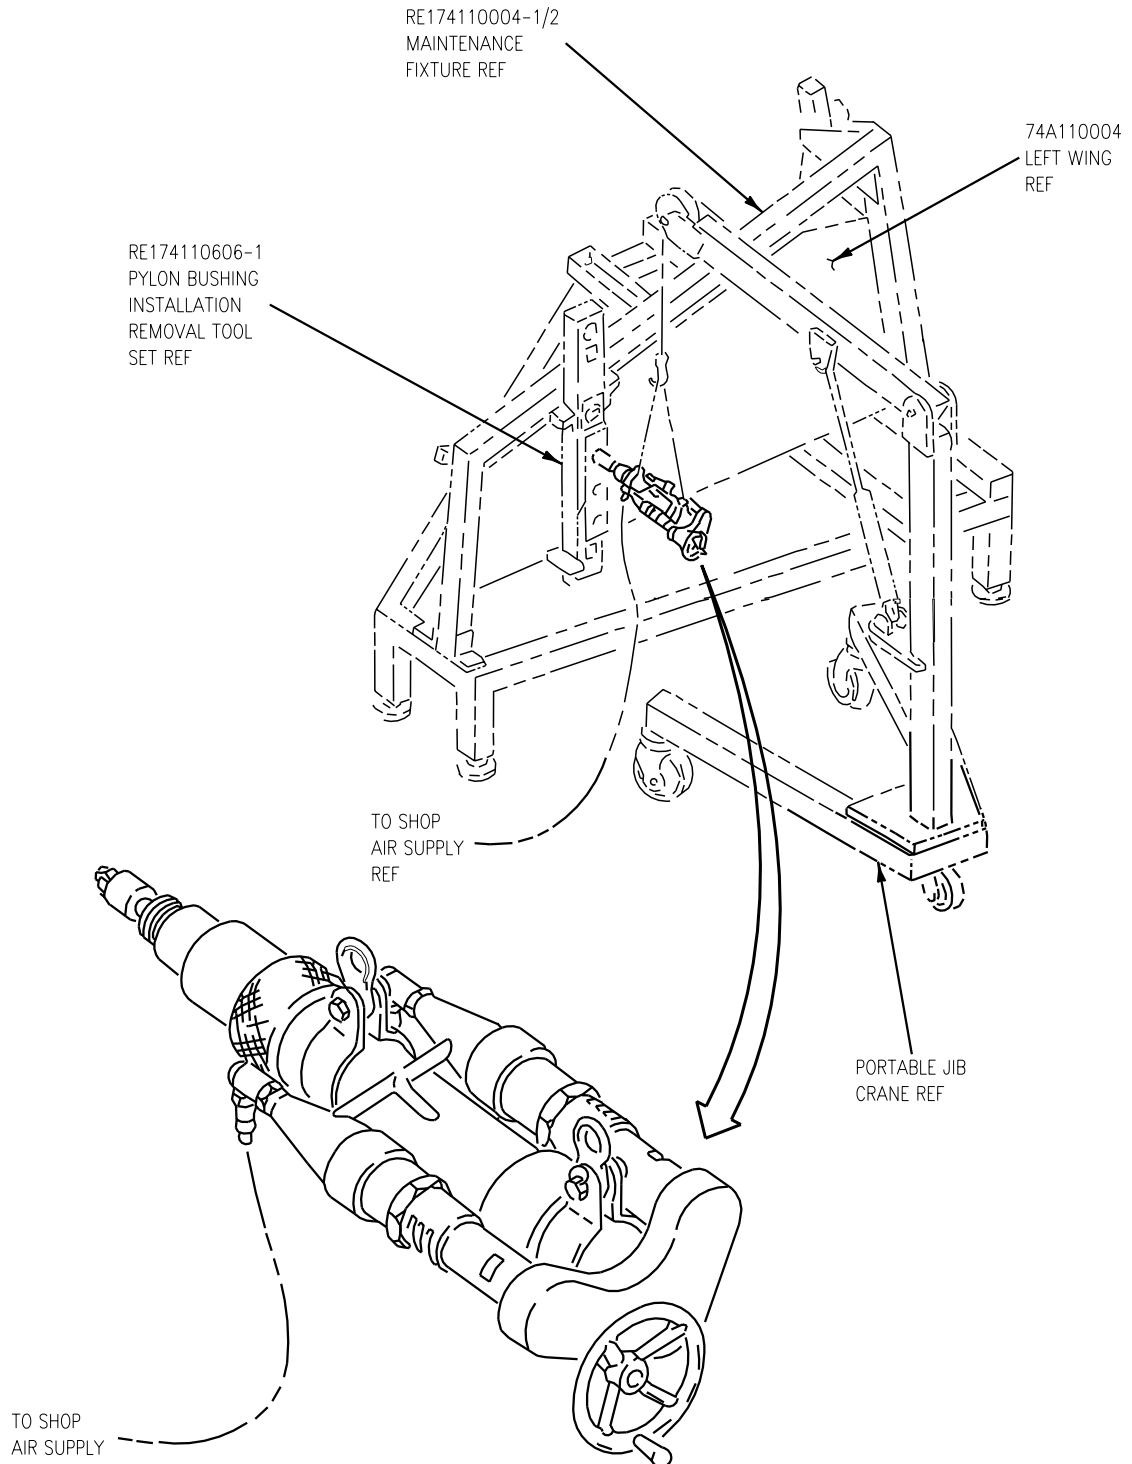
Typical Drilling Machine Setup (Sheet 3)
